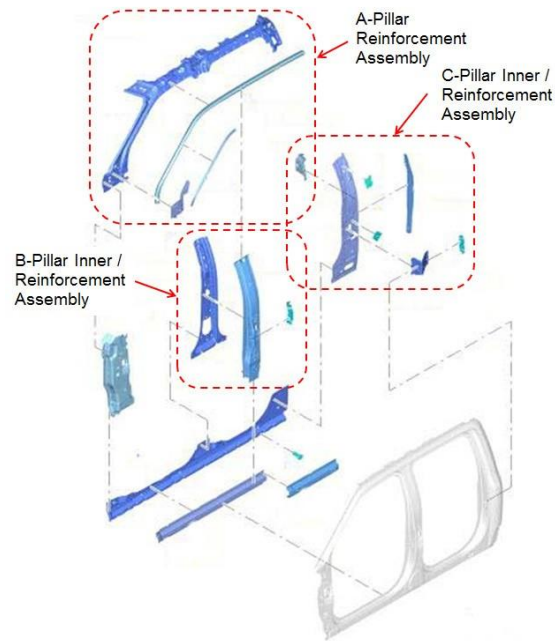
Typical Body Structure Service Parts Showing Body Side Reinforcement Assemblies
